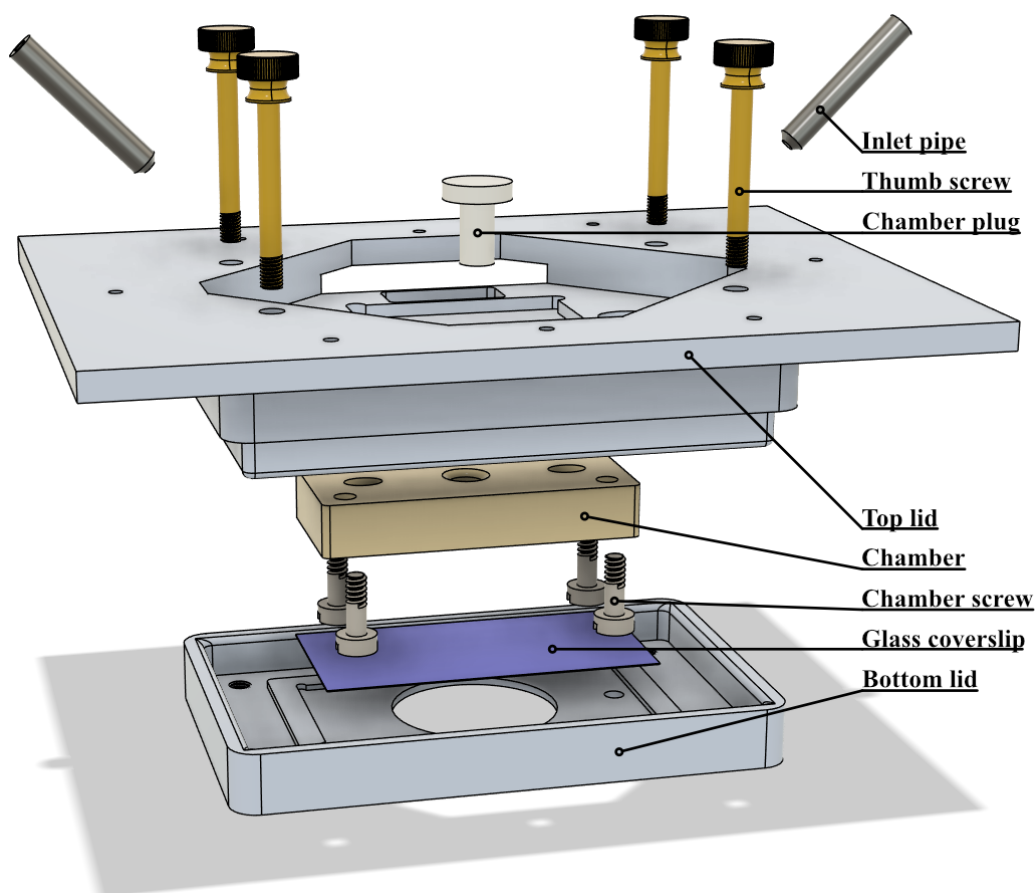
Exploded view of the sample cell holder and all the parts it consists of.
